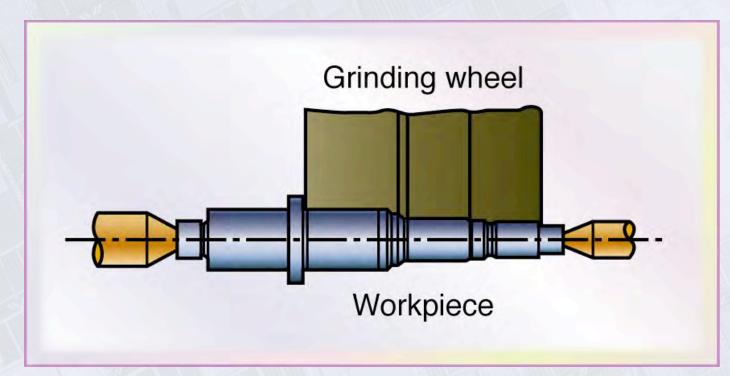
Plunge grinding of a workpiece on a cylindrical grinder with the wheel dressed to a stepped shape.
